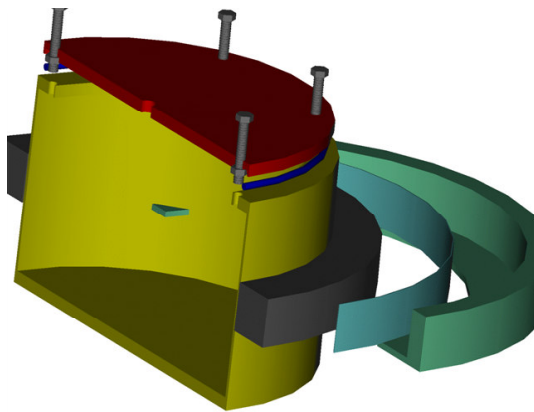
CAD view of the pressurized cylinder with mortar sample and mould
